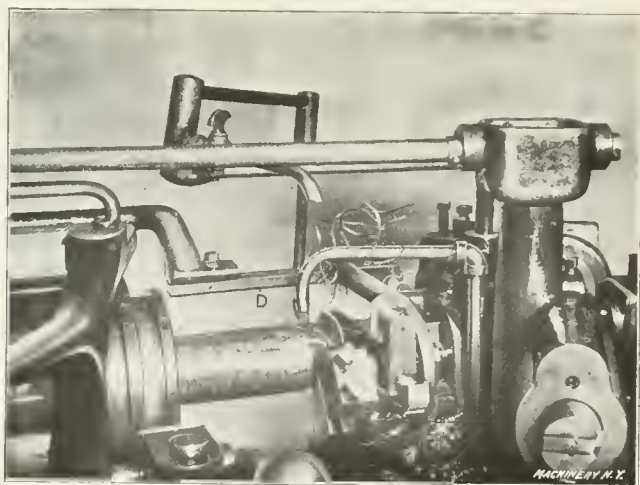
First Operation on the Mold Shell. Rough Turning and Boring
